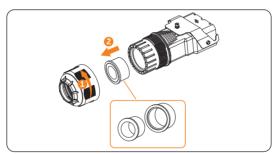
Disassembling the Grid&EPS terminal waterproof cover
